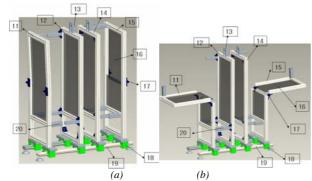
(a) Space adjusting between walls and (b) rotating walls.
